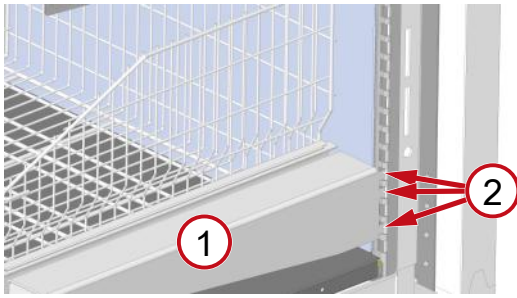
Attach bracket (1) – opening in rear panel (2)
